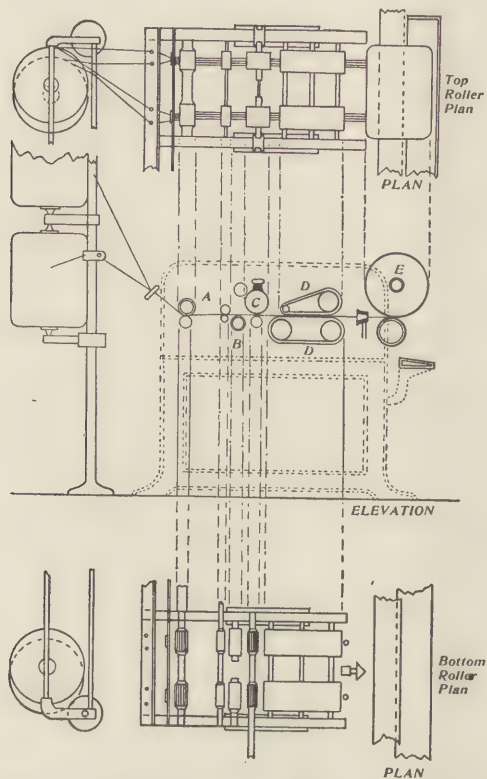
French Drawing Frame in Plan and Elevation.—*A*, back drafting rollers; *B*, porcupine; *C*, front drafting rollers; *D*, rubbing leathers; *E*, balling head.
